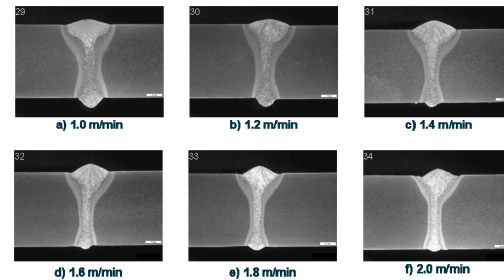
Welding of 9.5 mm thick X65 plate material with metal cored wire
